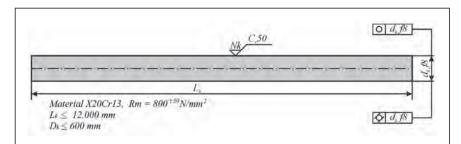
Piston rod  $\Phi$ 160 f8 mm
